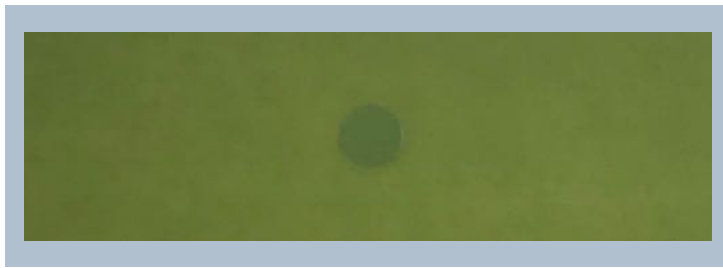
Example of a specimen with 10 *mm* radius PTFE insert.
